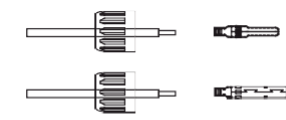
Insert the Wire into the Connector Cap nut and contact pin
